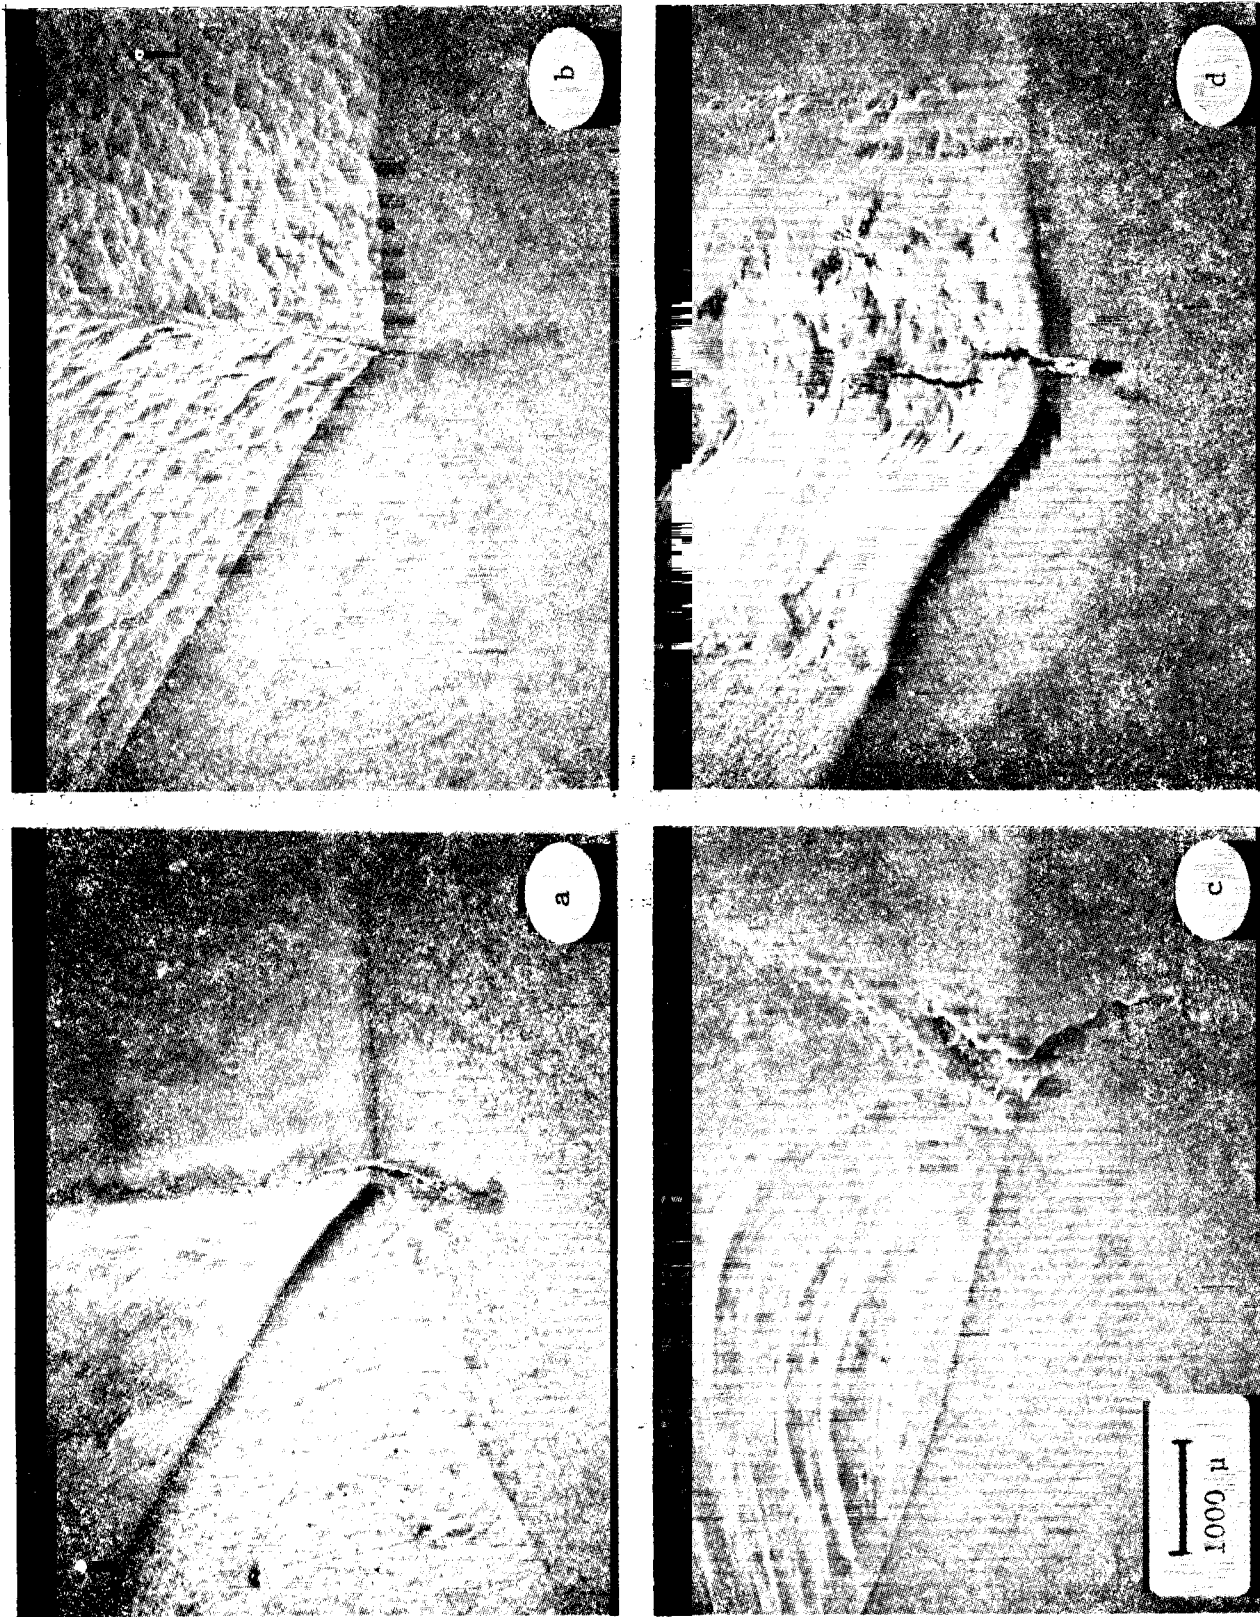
SEM Photographs of Toe Configurations of A36/E60S Specimens with Developed Fatigue Cracks; (a) As-Welded: Crack at Toe; (b) Shot-Peened: Crack at Toe; (c) TIG-Dressed: Crack at New Toe with Undercut; (d) Laser-Dressed: Crack at Dressed Bead with Severe Undercut.
